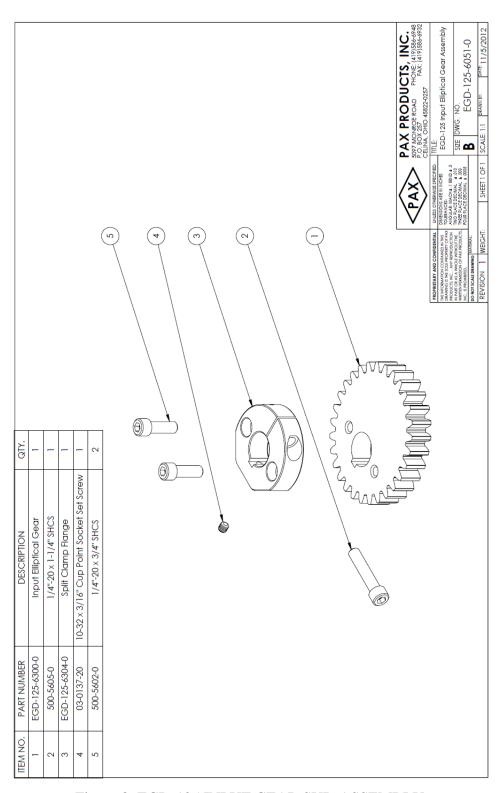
EGD-125 INPUT GEAR SUB-ASSEMBLY
